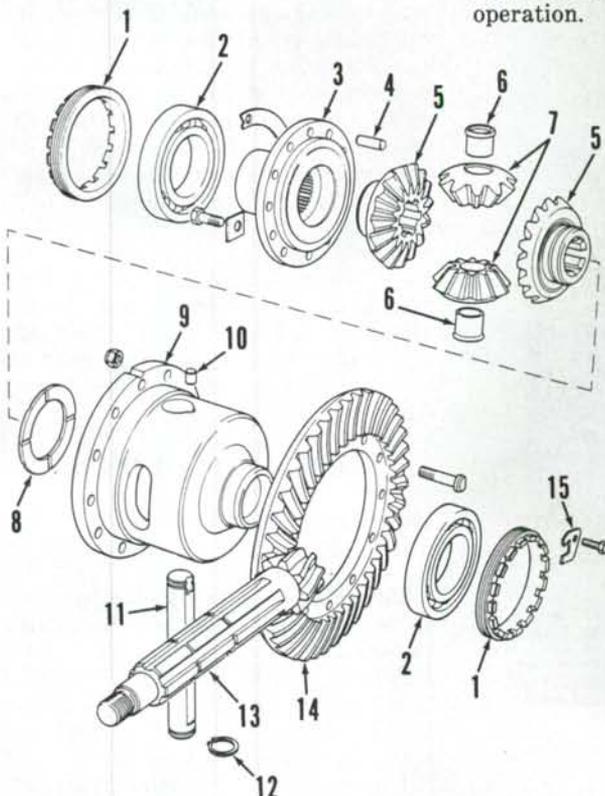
Exploded view of typical two pinion gear differential used on all models except 1594 and 1690. Note that thrust washers (8) and bushings (6) are not used on some models.
